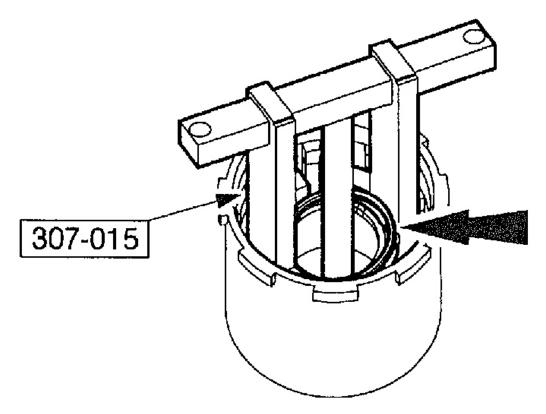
Installing Direct Clutch Piston Springs & Retainer
